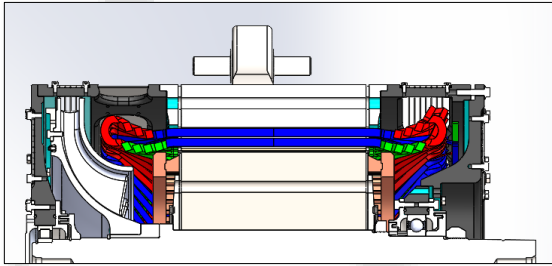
Electrical motor cross-section in the direction of the shaft axis
